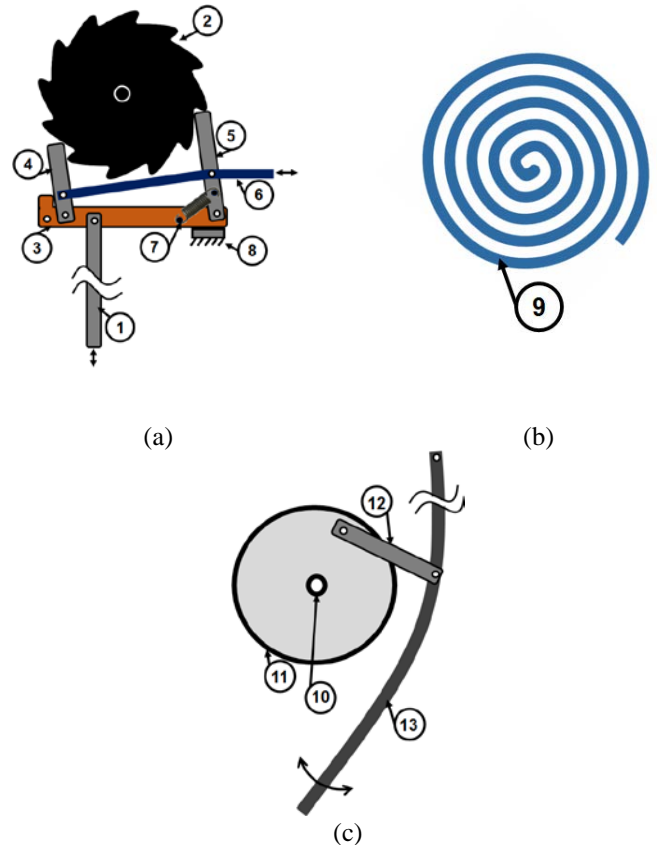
Detailed Design (a) Part 1 (b) Part 2 (c) Part 3
